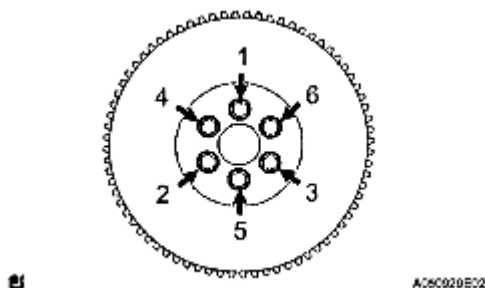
Locating Ring Gear Sub-Assembly Bolts Sequence
